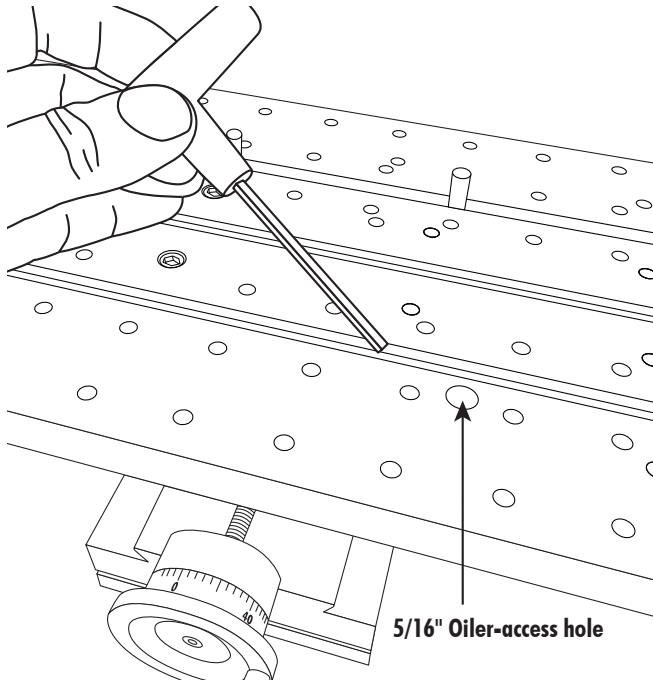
Oiler-access hole. Please note that the hex key is used for demonstration purposes only. It is not included with the tooling plate.
